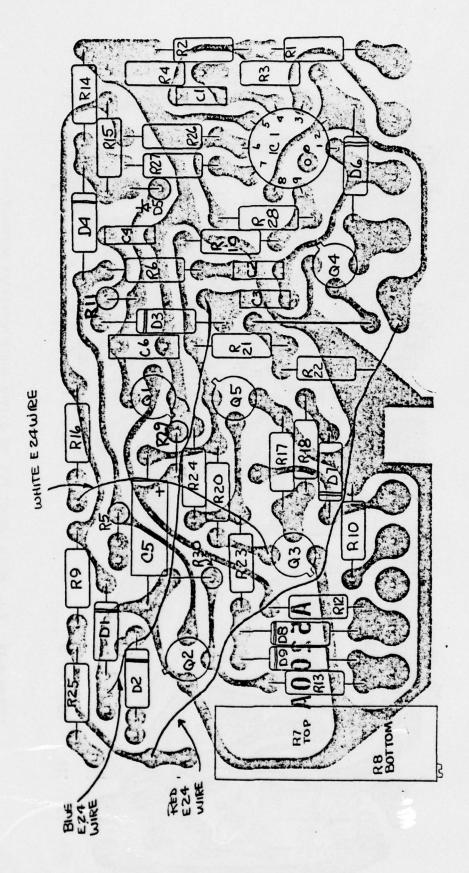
P.C. BOARD LAYOUT FOR THE A5200A RECEIVER SQUELCH AMPLIFIER ASSEMBLY
